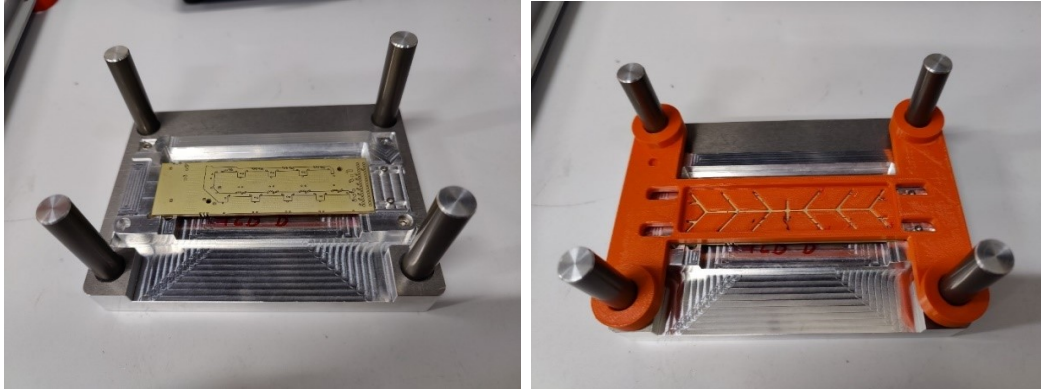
(a) Fixation of FEB on the tool at the right position; (b) Stencil to draw the glue pattern.
